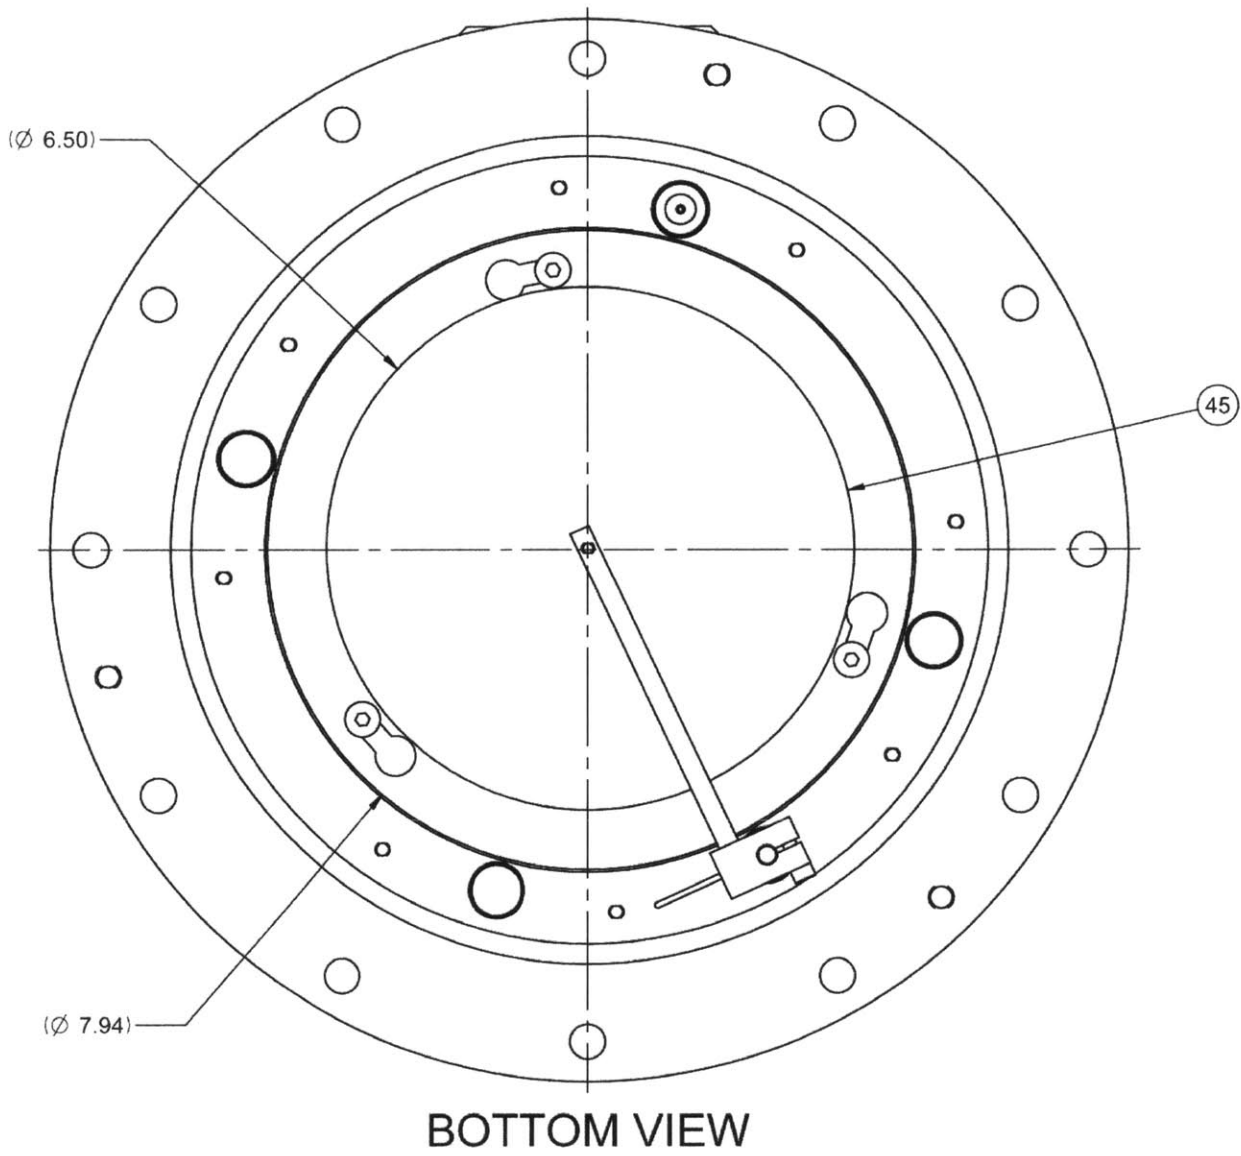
Engineering drawing of top flange of oCVD reactor chamber for stage—bottom view.
